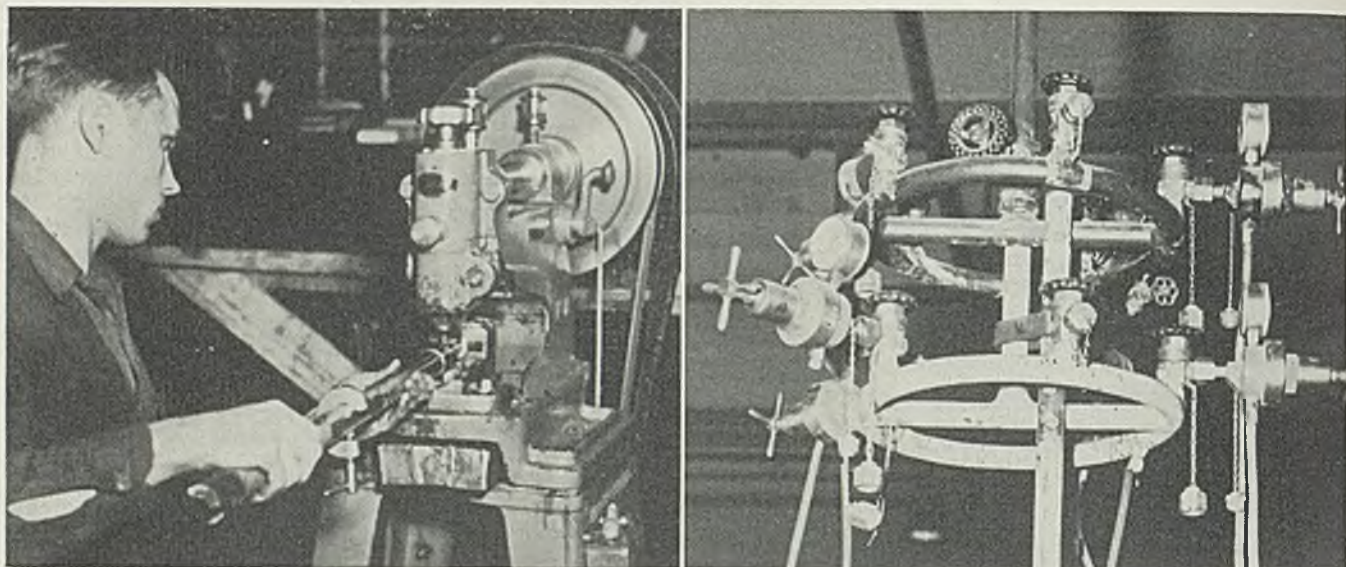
This bronze-welded jig, left, is being used for shaping the ends of a tubular member. Fig. 4—Floor space is conserved by supplying oxygen and acetylene to the welding stations through drop rings like this shown at right
